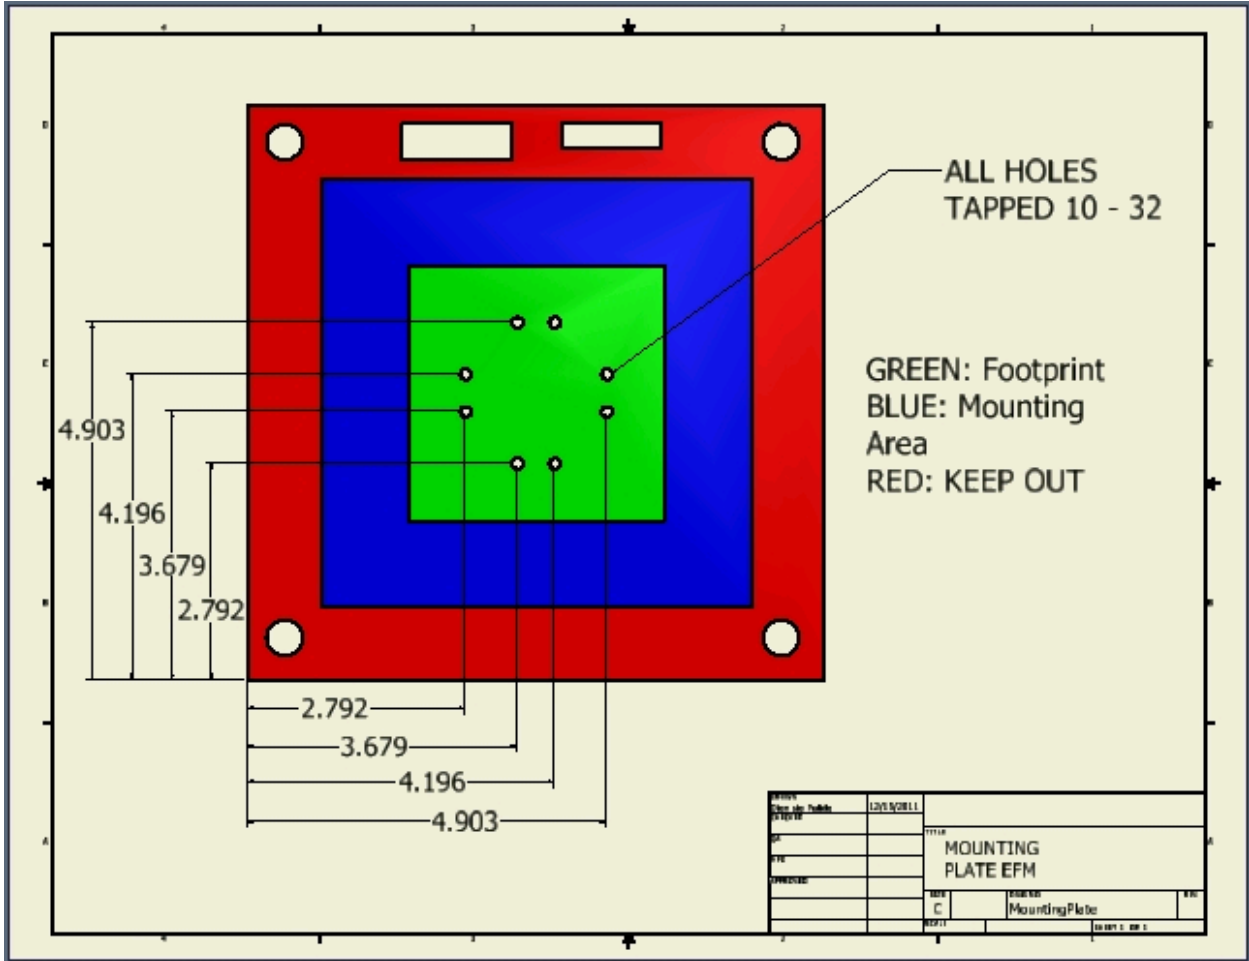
Diagram of modified mounting plate for the electrical field mill
